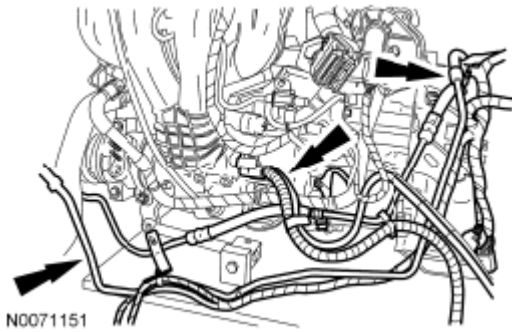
Locating Power Steering Tubes And Wiring Harness
